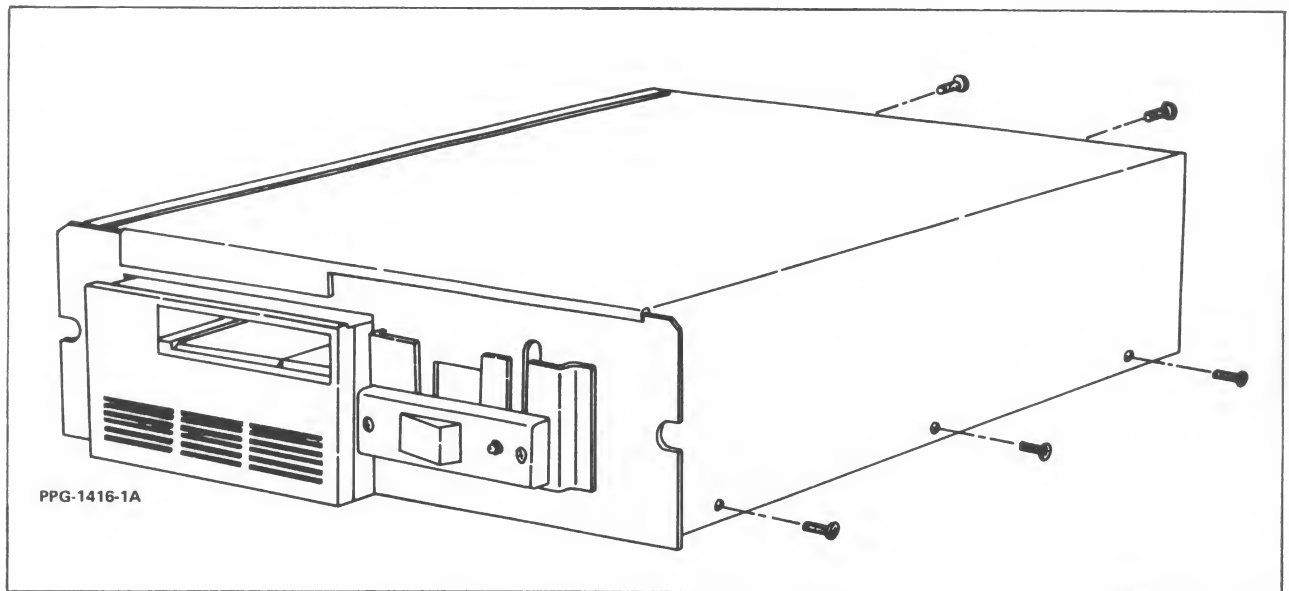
Removal of Tape Cartridge Drive Enclosure Top Cover
